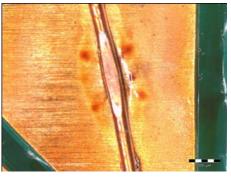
Example of electronics application: welded cooper enamelled wire with a diameter of 50 μm.
